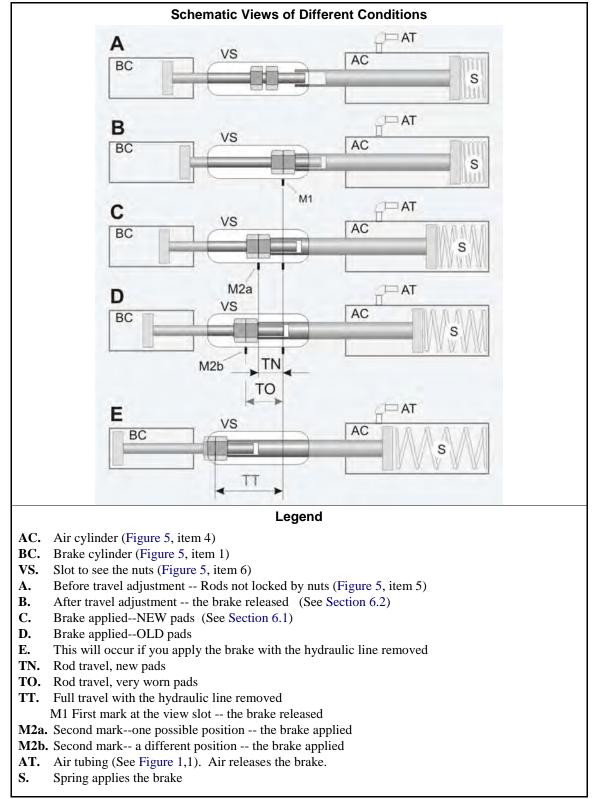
The Adjustment between the Brake Rod and the Air Cylinder
